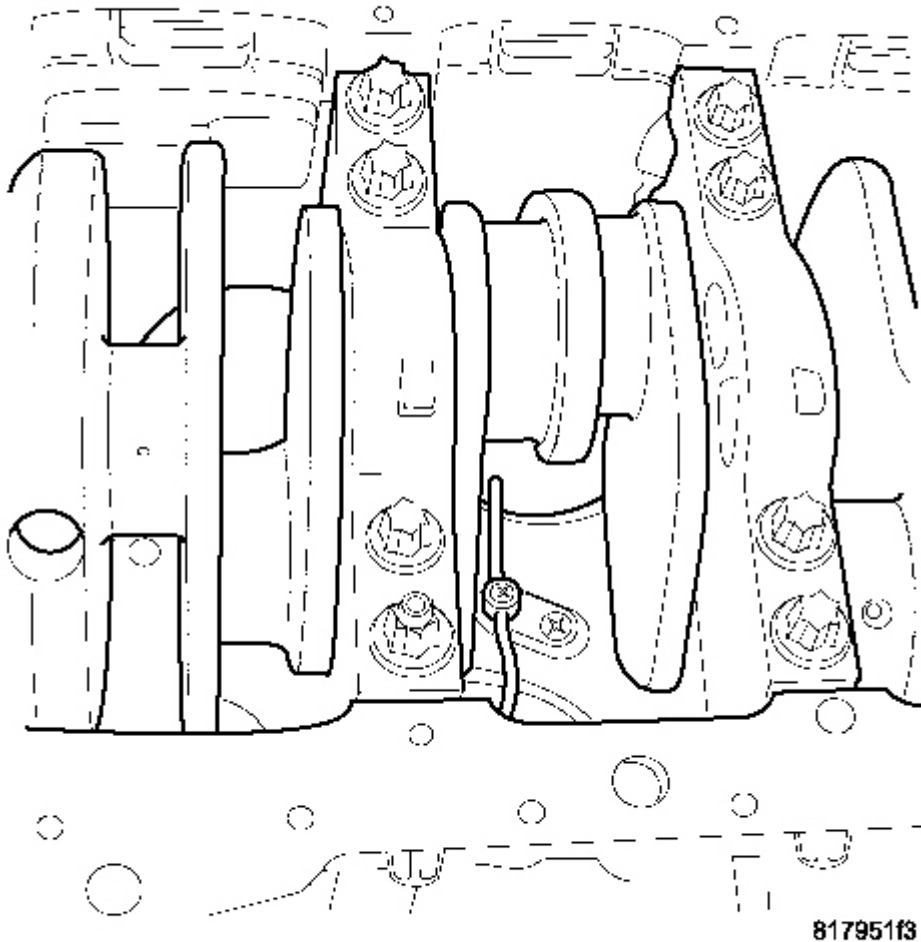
Identifying Crankshaft Main Bearing Caps, Crankshaft, Thrust Washer & Crankshaft Bearings
